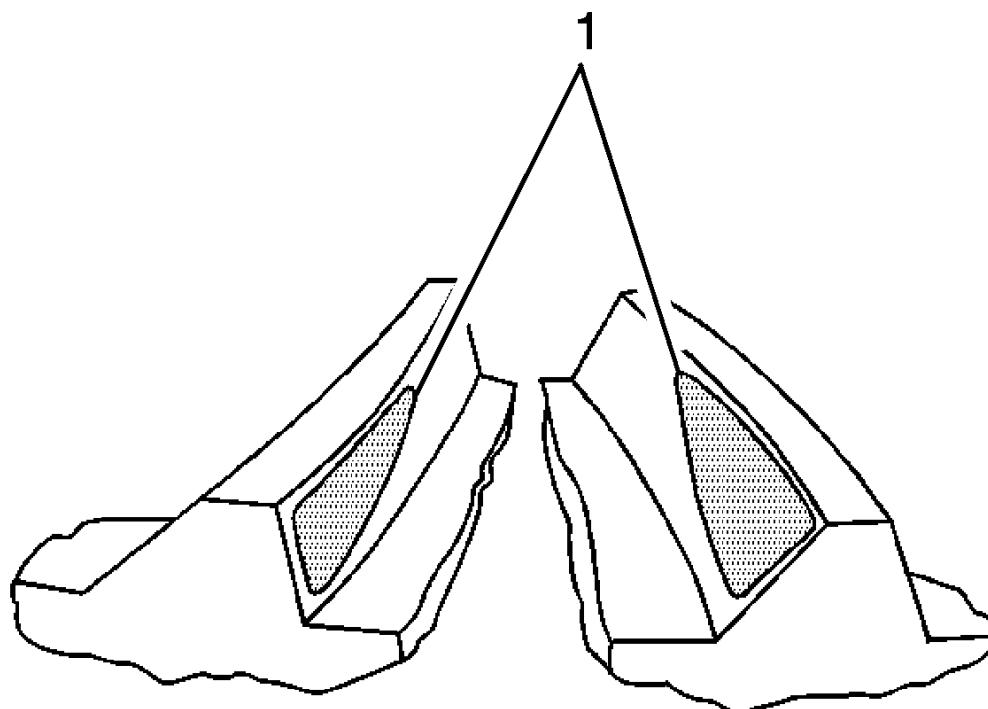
Identifying Drive Side Heel - Coast Side Heel Contact Pattern
